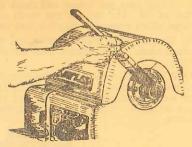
Bent wire filed on ends to a V-shape should be used to remove dirt and chips from chuck threads.
